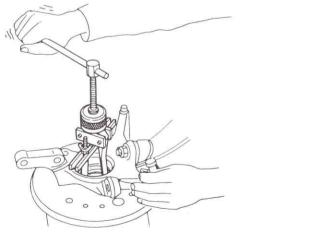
Using a puller to remove the outer bearing (Sec 5)
